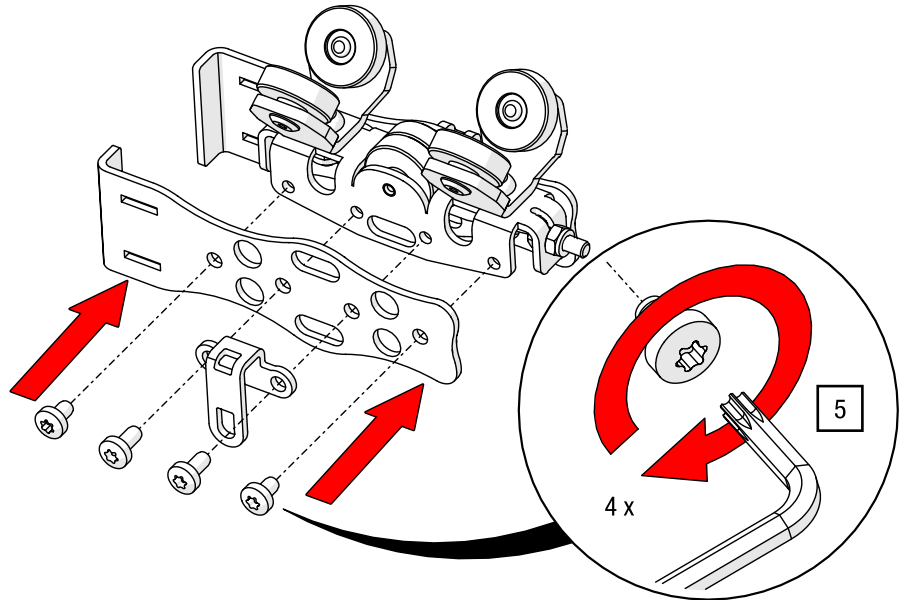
Master runner with add-on brake – Side plate and eyelet plate mount
